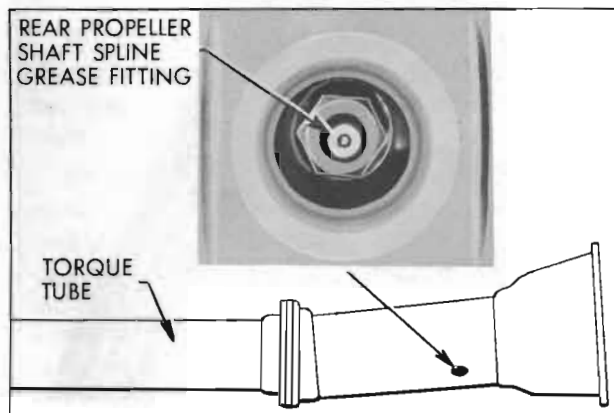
Rear Propeller Shaft Spline Grease Fitting
